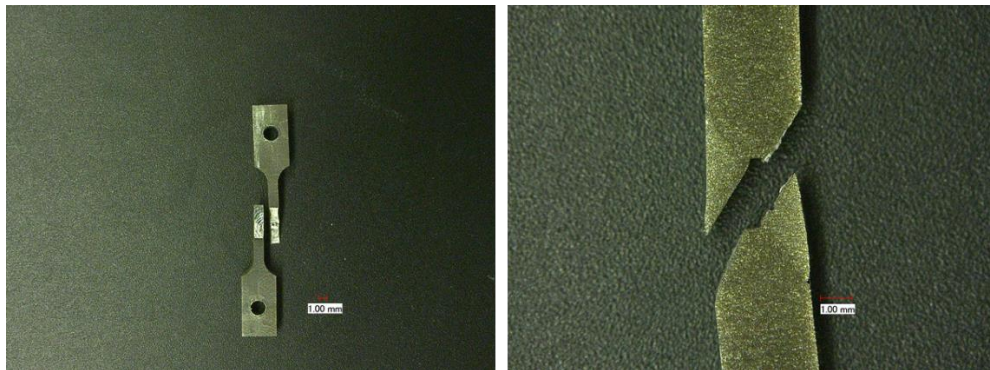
TiNb to TiNb Welded Sample After Tension Test
